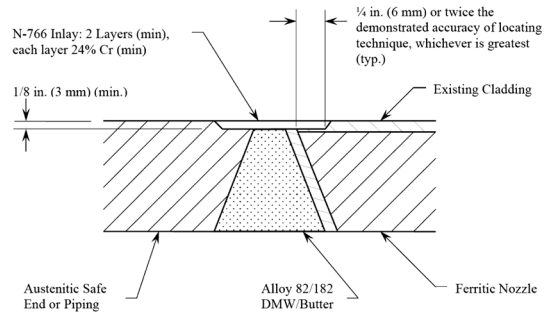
Typical design of Inlay weld in ref [20]
